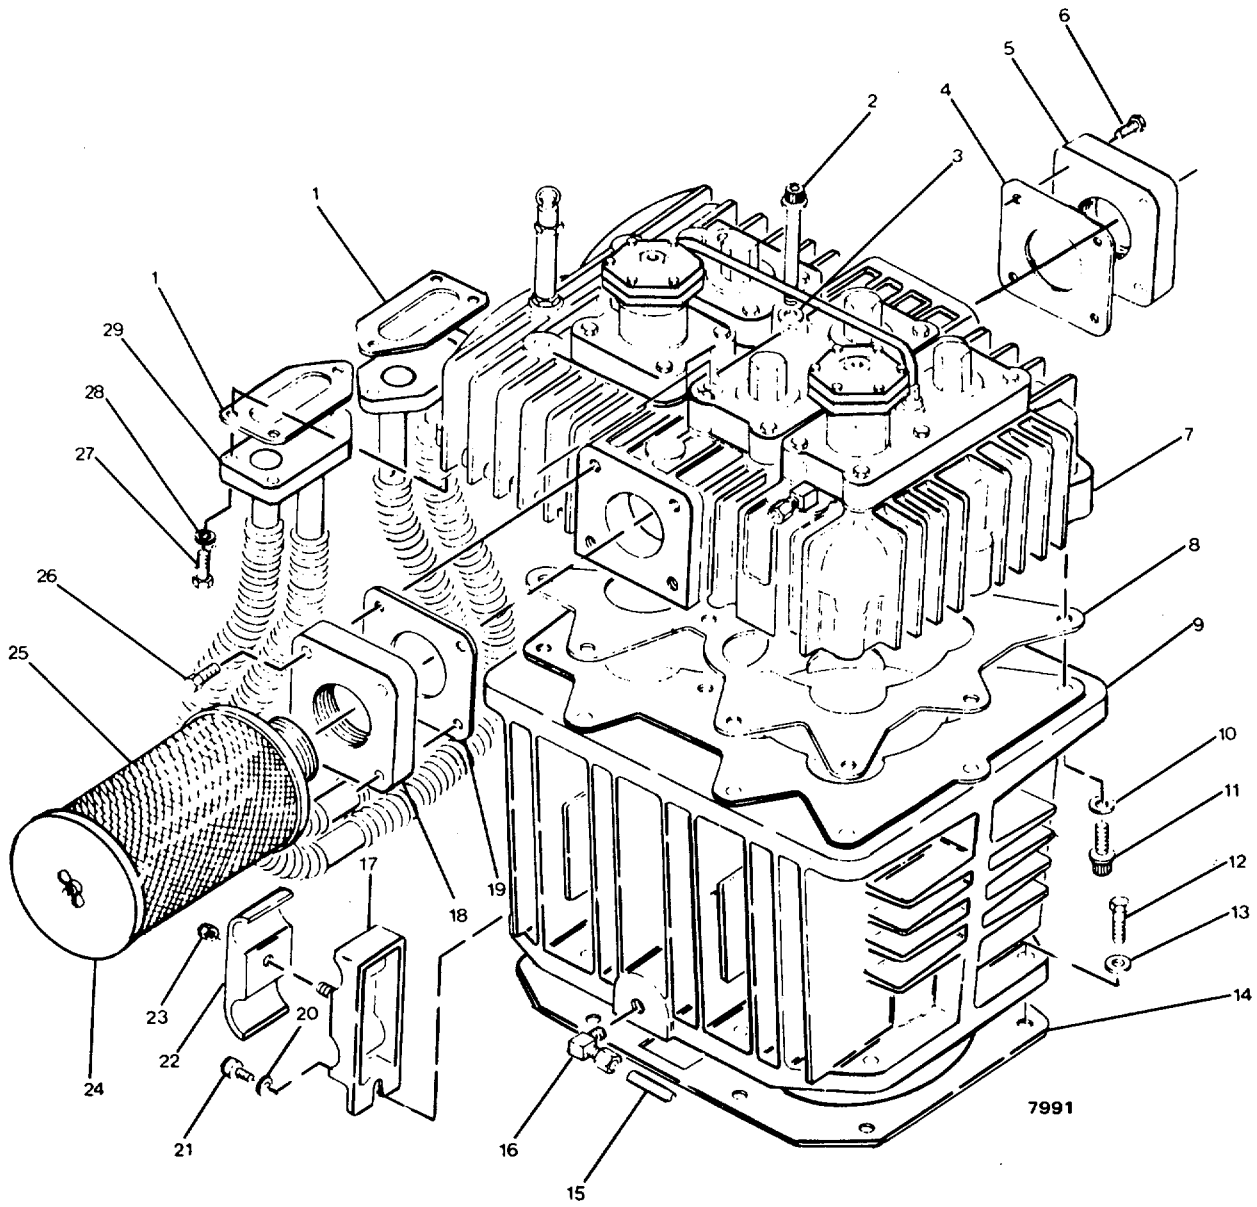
Repair of Cylinder Block and Head Assembly.
